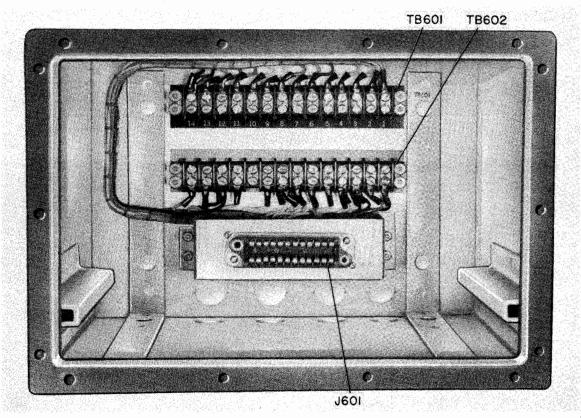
Adapter, Control MX-1743A/SRC Internal Back Box View, Panel and Chassis Removed
